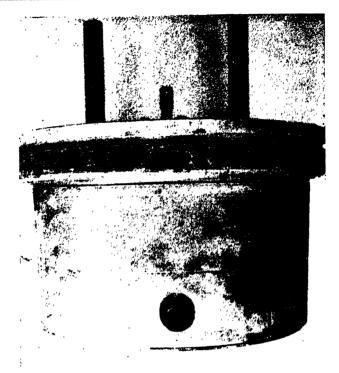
Cylinder Head Showing Corrosion at the Seal Ring Area.
